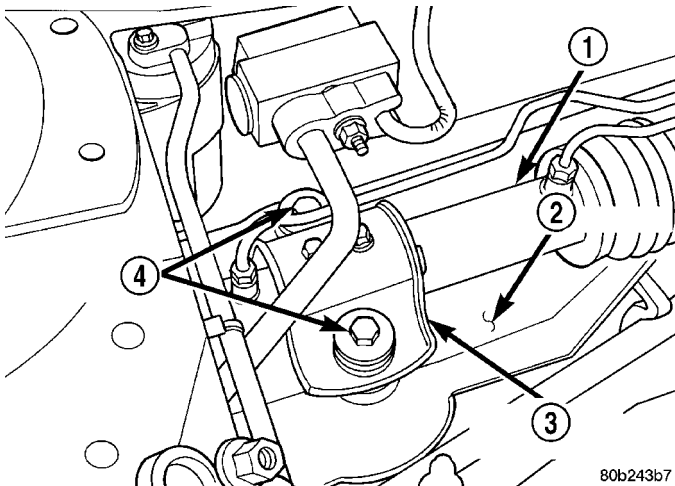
Steering Gear Attachment To Crossmember (Right Side)
